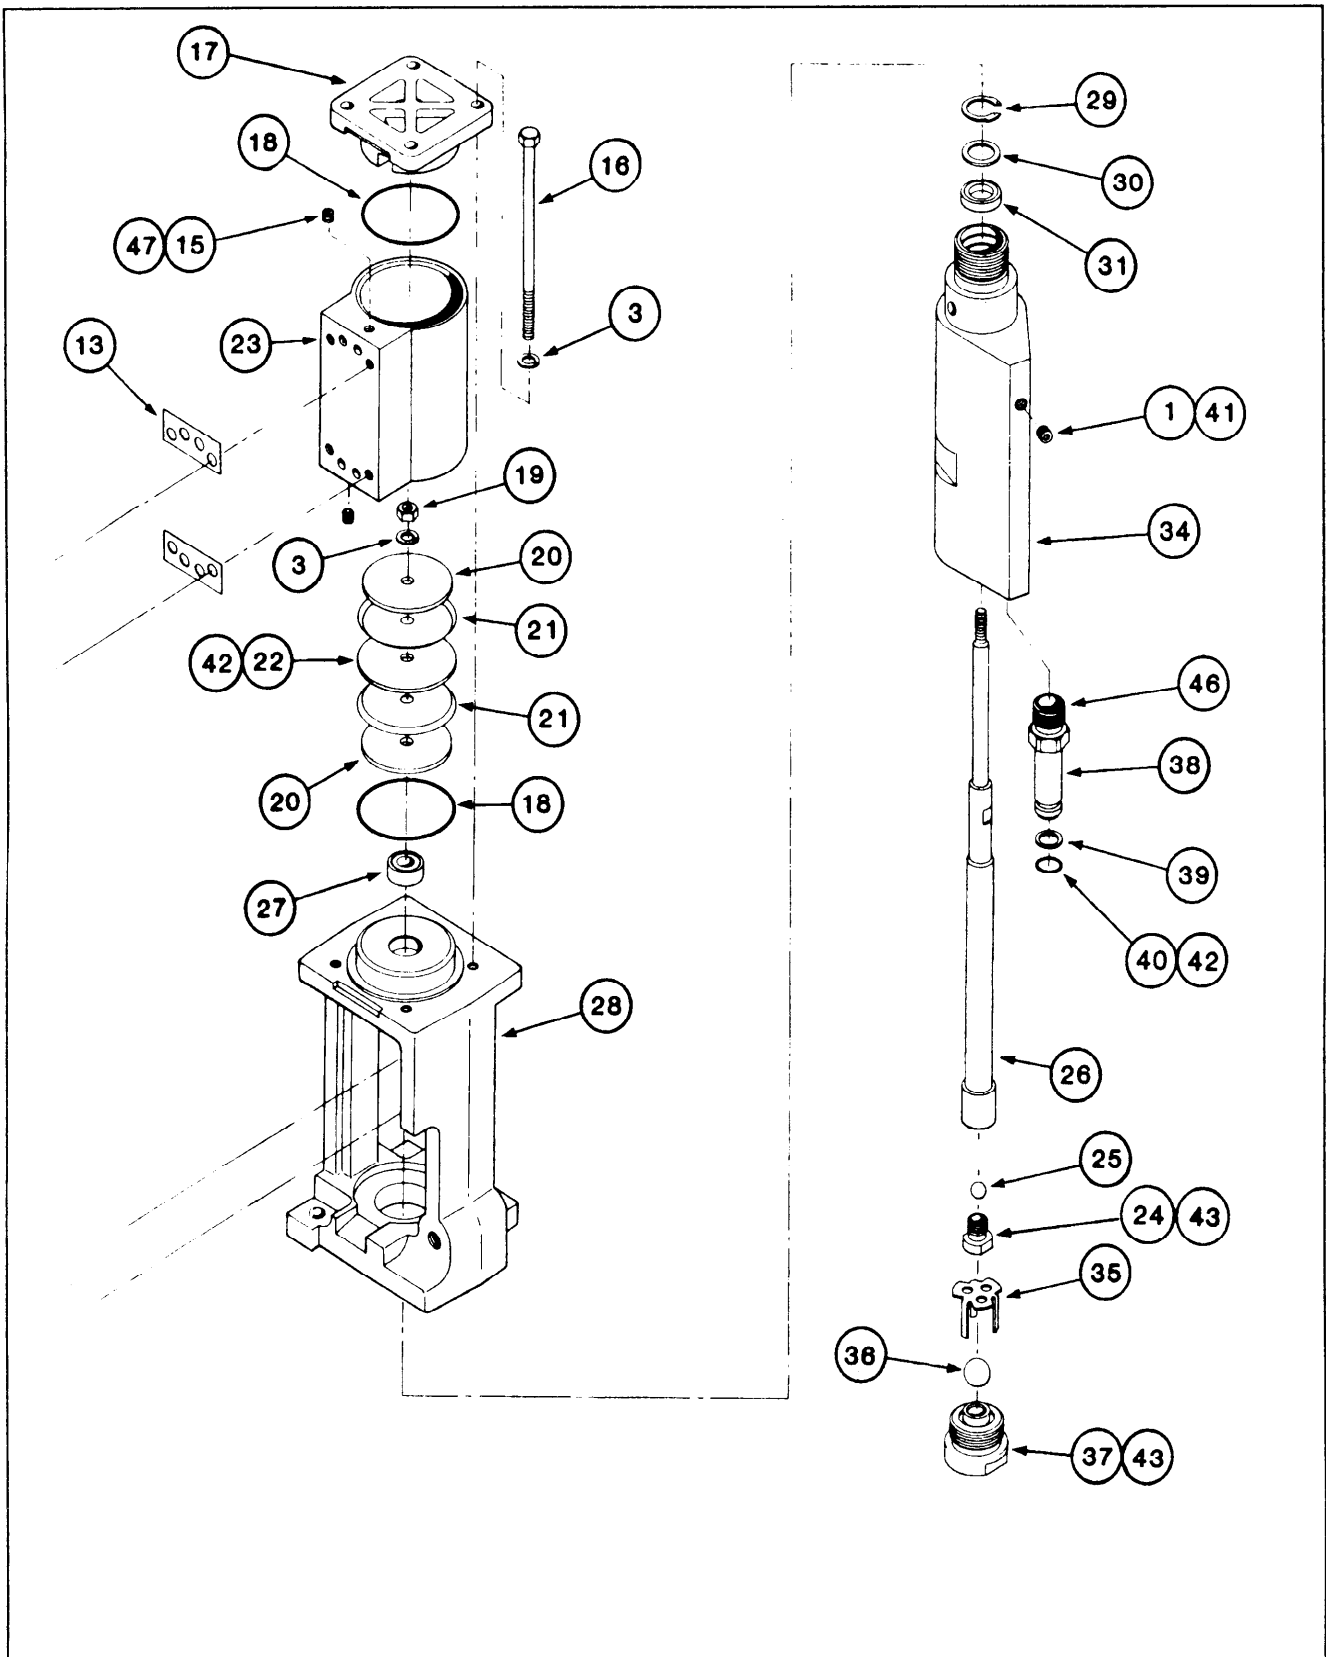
Pump Assembly (Drawing 2 of 2).
